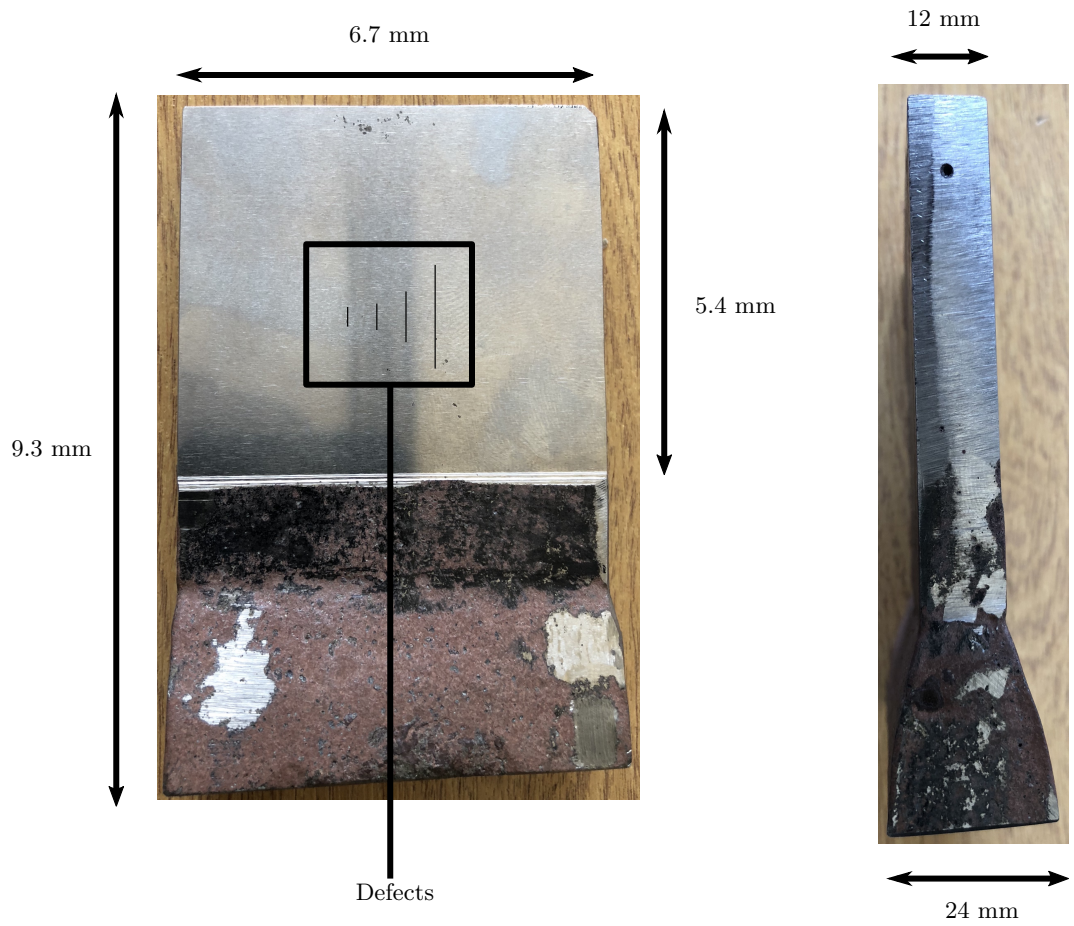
Picture of the titanium aluminide sample showing its dimensions. Four defects with dimensions presented in table 6.4 have been laser micro-machined onto its surface. The sample was corroded, and had to be ground to get the smooth surface.
